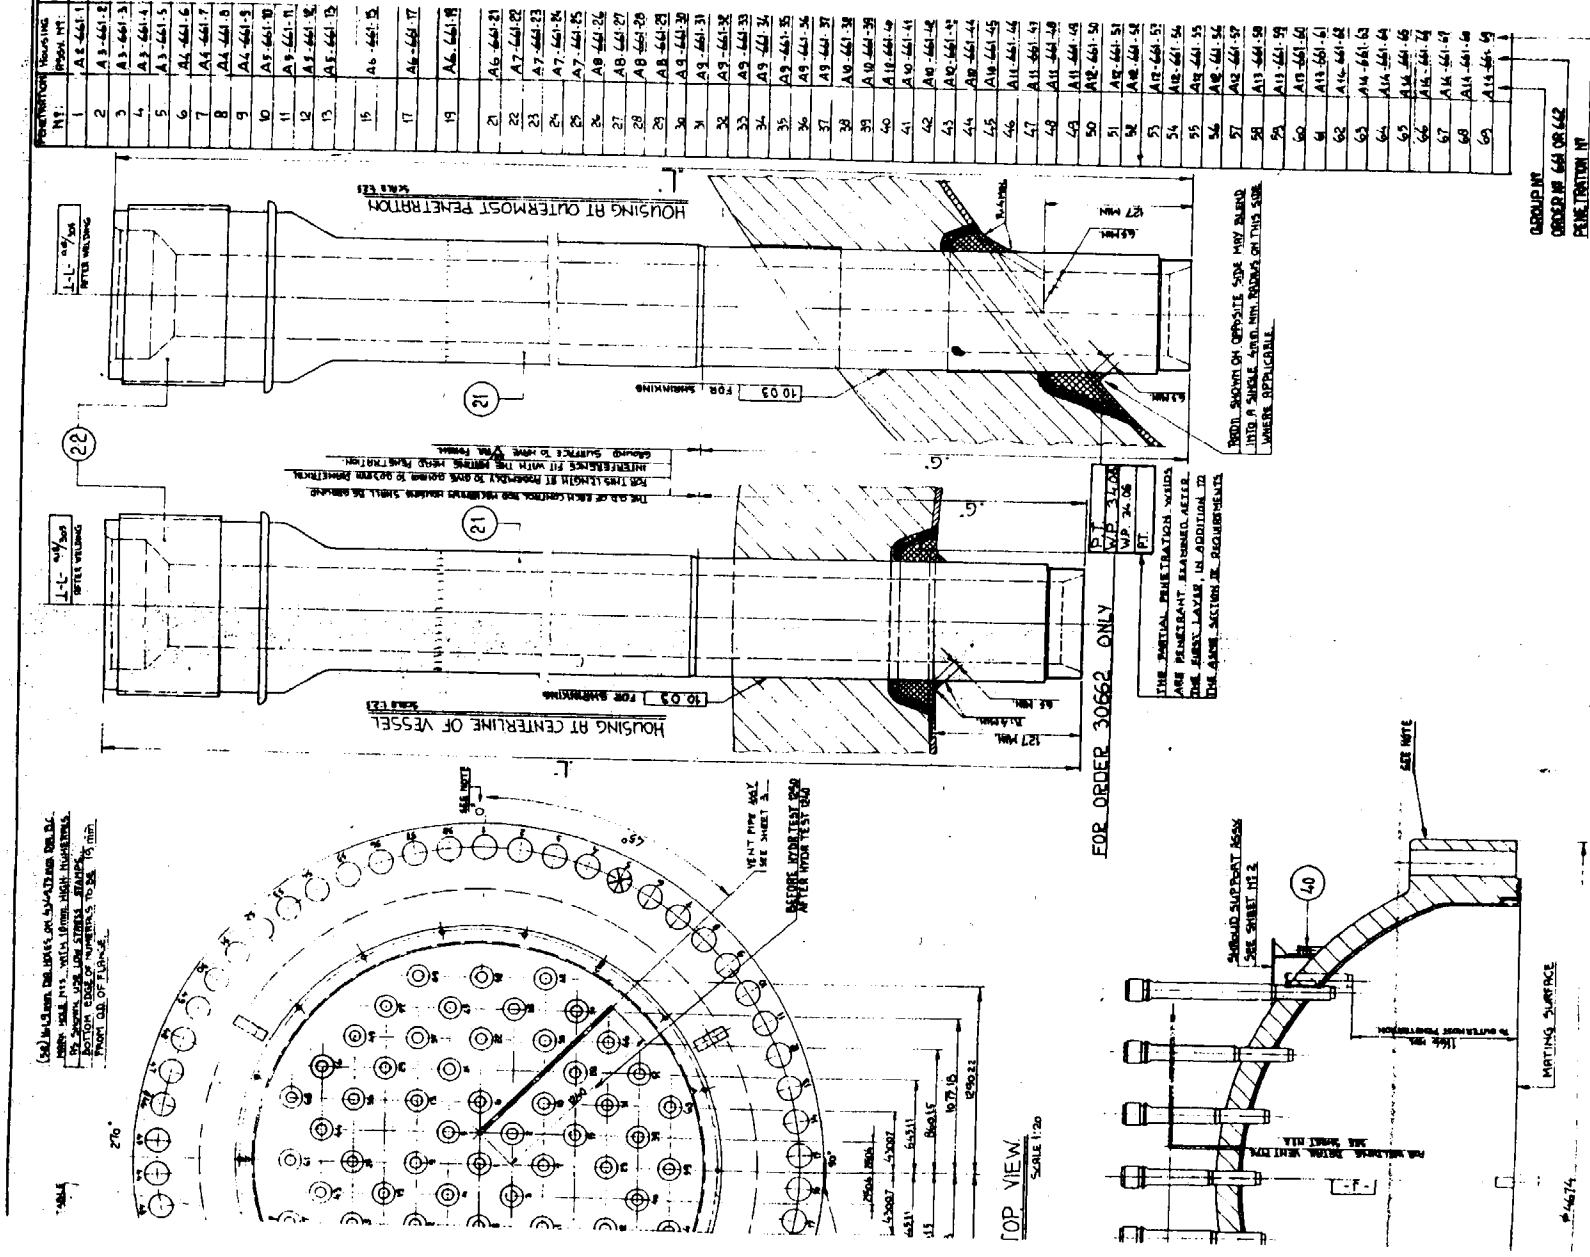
Reactor Vessel Closure Head Showing Penetration J-Groove Weld Joint
